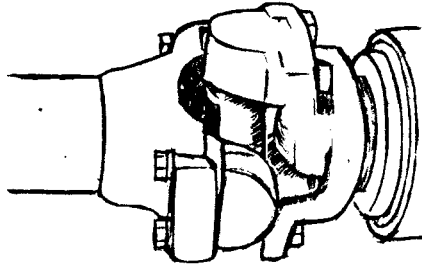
Universal joint of tumbling shaft. Corresponding yokes of all three joints are lined up so they turn together.
